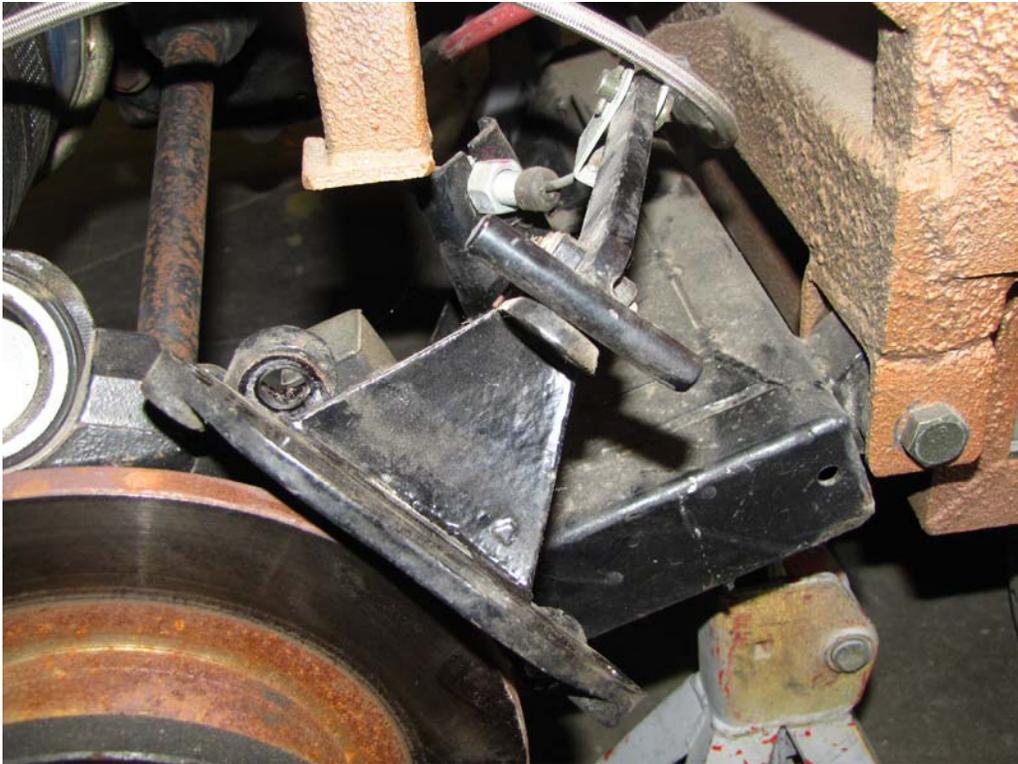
RIGHT REAR PARKING BRAKE ASSEMBLY
